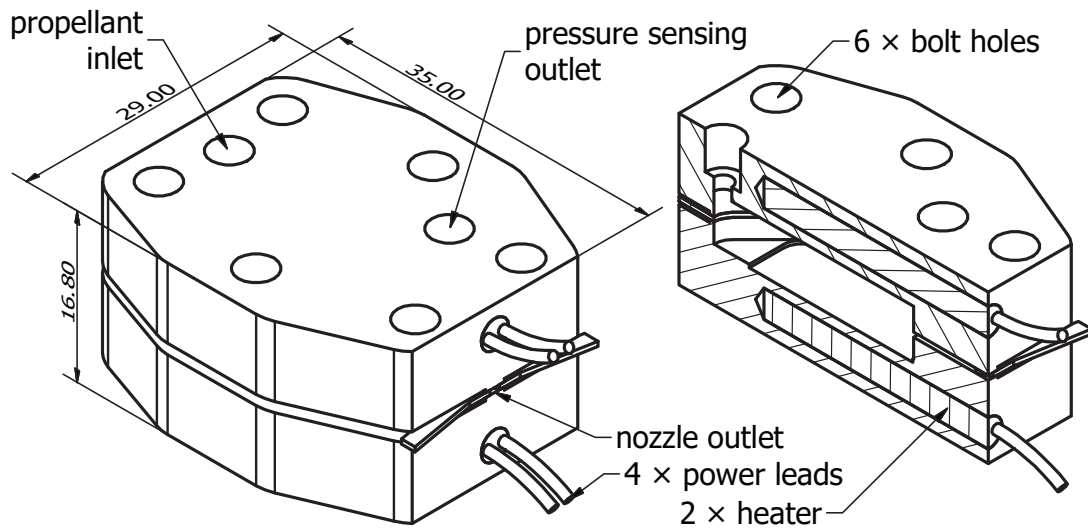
Isometric drawings of the thruster body (left, without bolts and foam), with a section view through the middle of the body (right). Several connections, components and dimensions indicated, all in mm.
